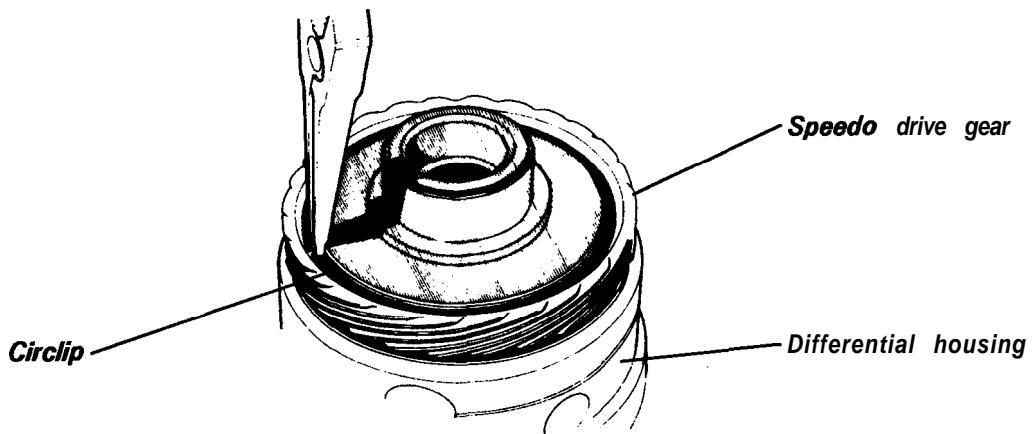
BEVEL GEAR DIFFERENTIAL (S4) - Disassembly.
